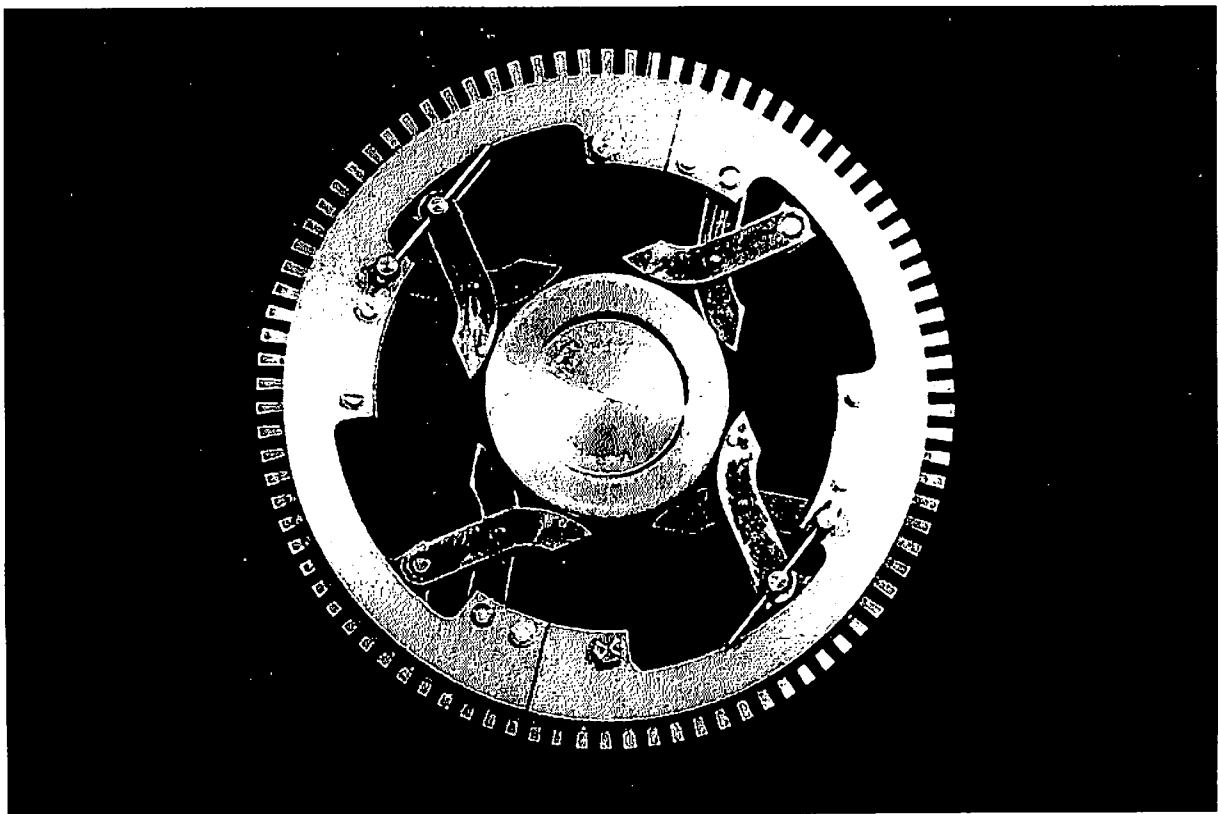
Divisible chopper disk, shaft diameter 80-120 mm, fully assembled
